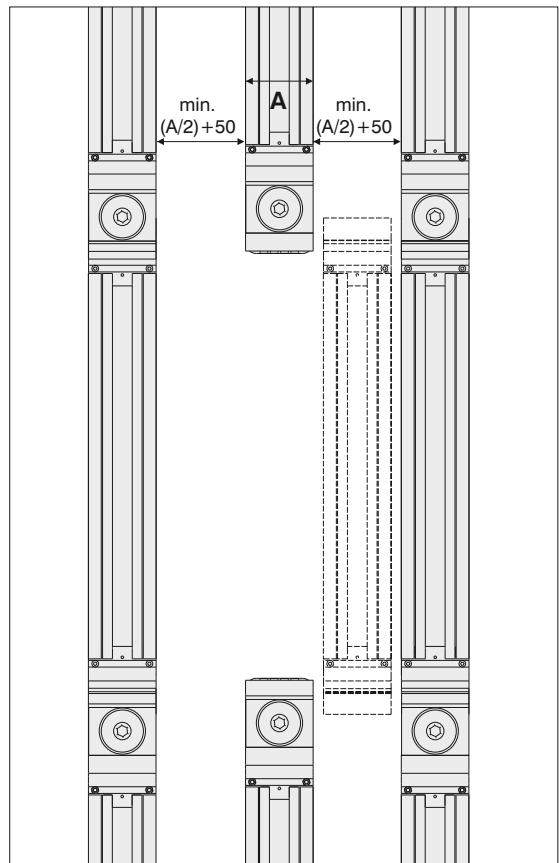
CROSSING UNDER A BEAM HORIZONTAL POSITION
